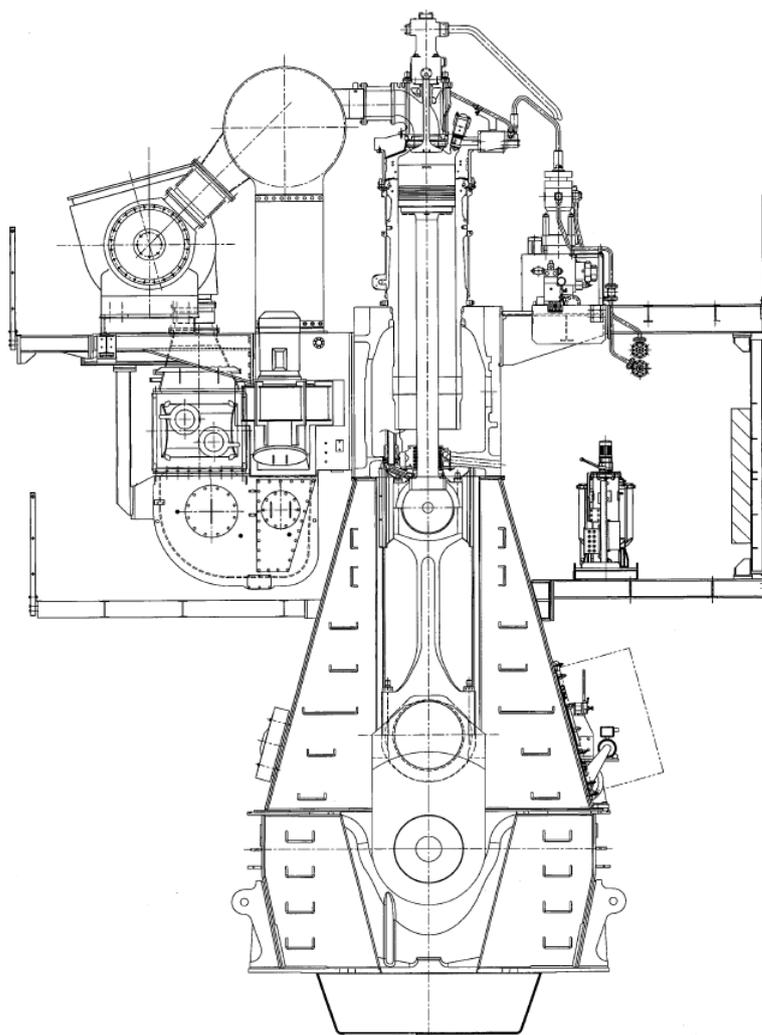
Cross-section of the KOBE DIESEL-MITSUBISHI 7UEC60LSE-Eco-A2 engine
